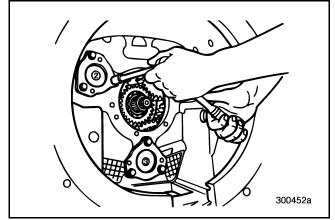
Removing No. 2 Front Countershaft Front Bearing Cover Capscrews
